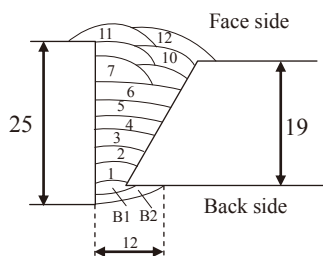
Welding pass sequence of the beam-to-column joint
